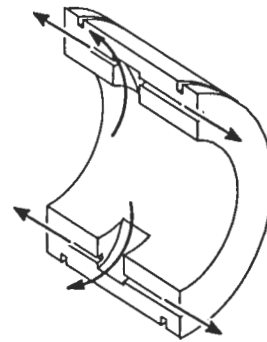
Camshaft Intermediate Bearing (Lower Half)
